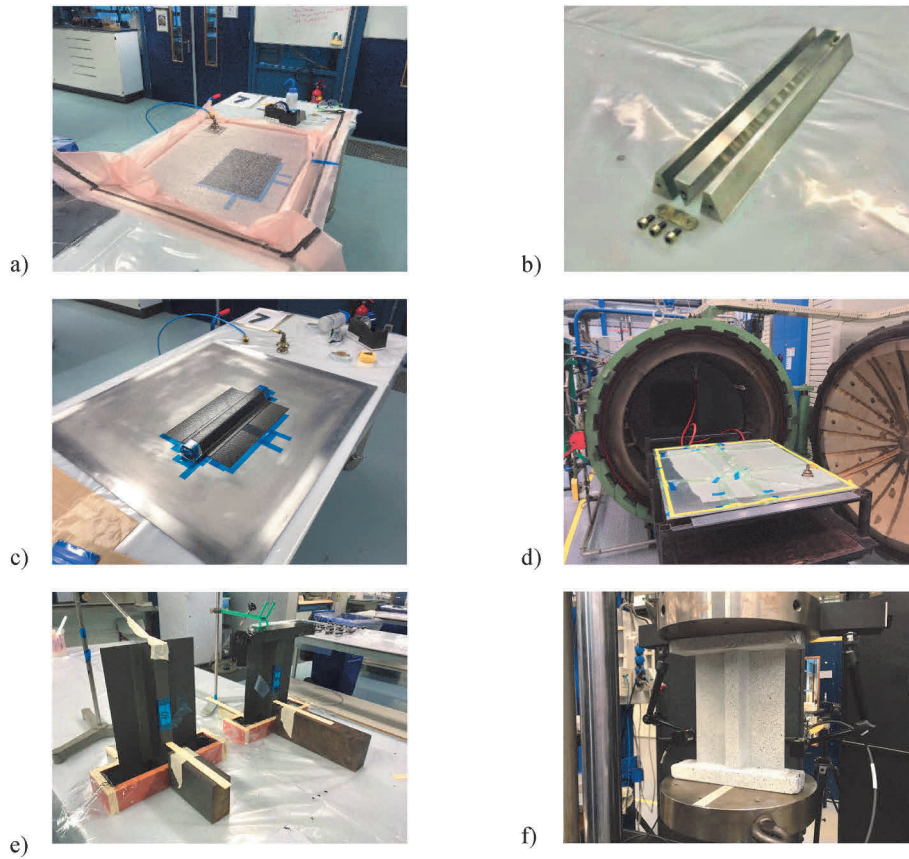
Manufacturing process: a) debulking of skin plies; b) disassembled stringer mold; c) lay-up of stringer; d) specimen going into autoclave; e) casting of resin tabs; f) specimen ready for testing.
